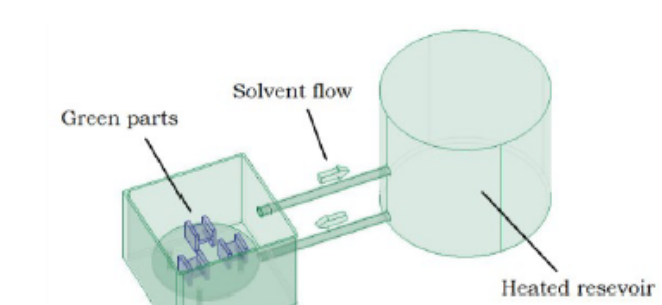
The solvent debinding apparatus used heated water for removing the water soluble PEG binder component.
